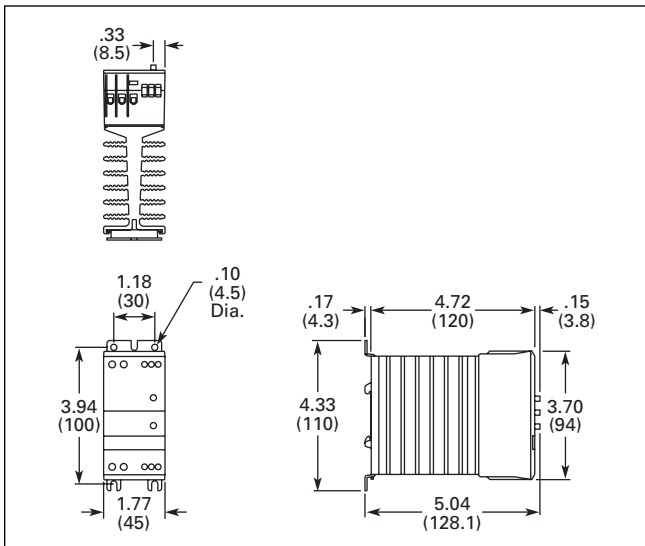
45 mm Frame — Approximate Dimensions in Inches (mm)
